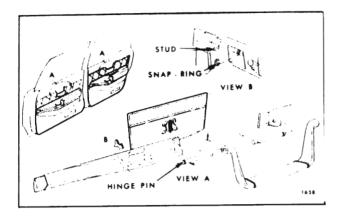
Door Pull Handle Assembly - 38669 Styles
